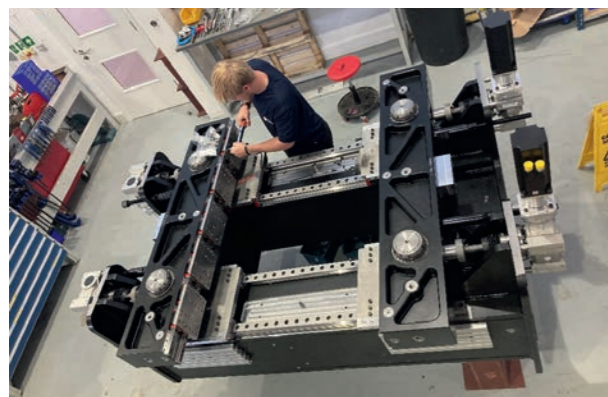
Start of assembly of the first Diamond-II insertion device. Initial assembly and first stage motion testing are carried out with the device 'on its back'.
